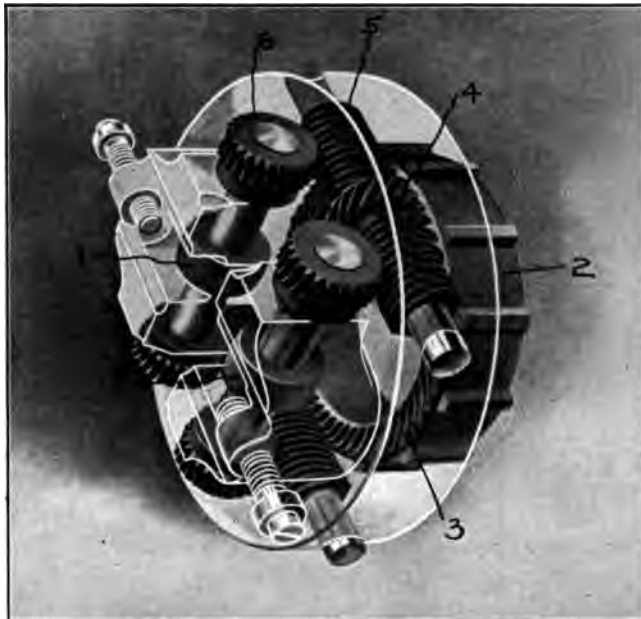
ROLLER FEED. JONES & LAMSON MACHINE CO.
